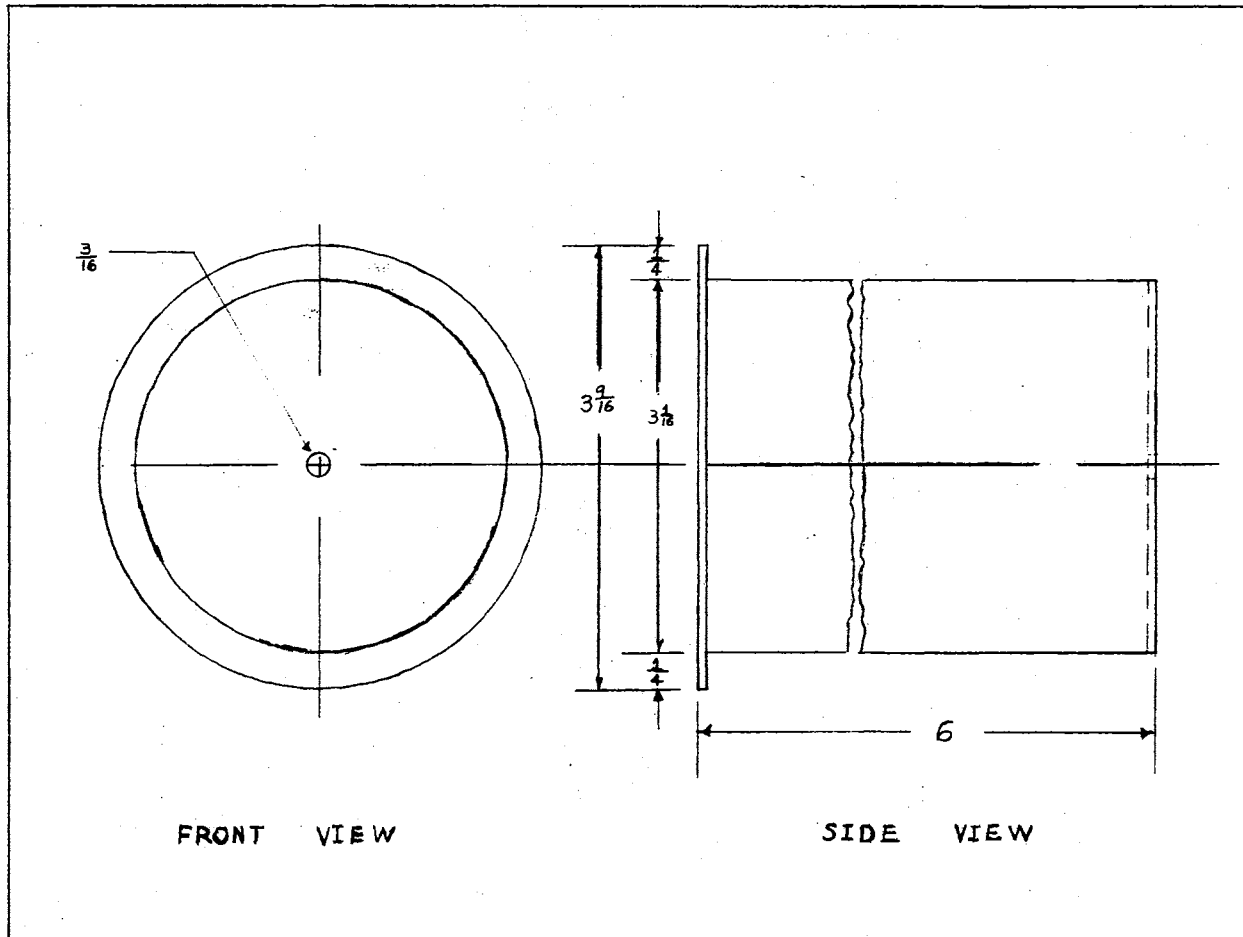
Detailed Dimensioned Drawing for the Metal Covering which Protects the Insulation Around the Fusible Rod Containing Tube
